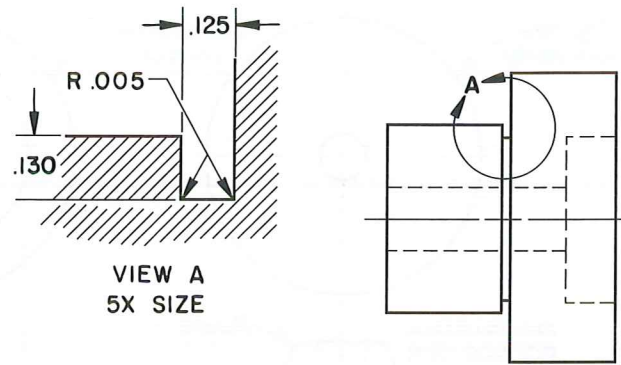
Sometimes it is necessary to provide a removed partial view that is enlarged to clarify information, such as a machining detail.
